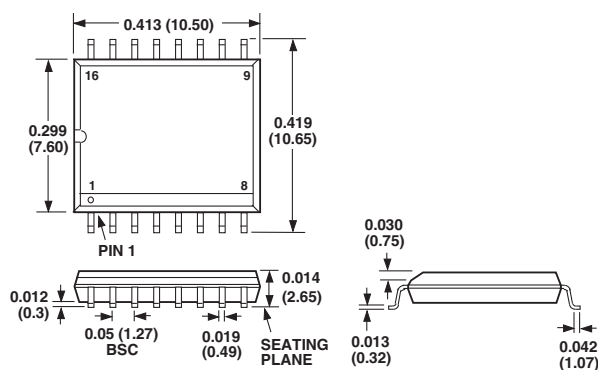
16-Lead Wide-Body Small Outline Package [SOIC]
